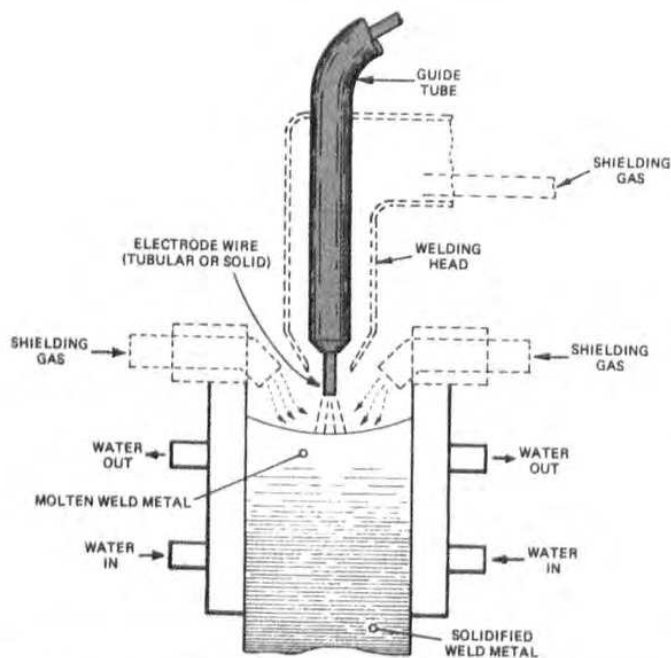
Process diagram for electrogas welding.
